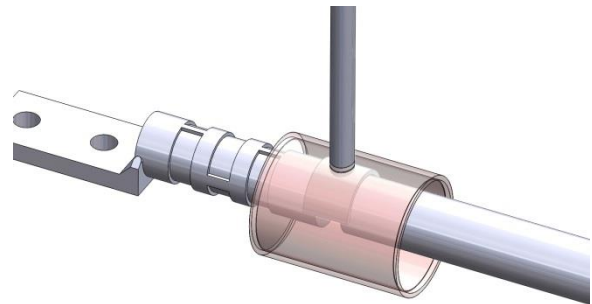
Use the Teflon tool to hold the heat shrink and saddle in place.
